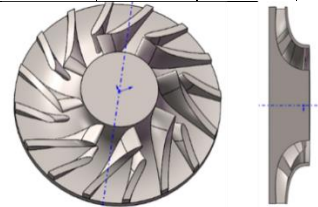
Three-dimensional model of impeller of first stage centrifugal compressor
